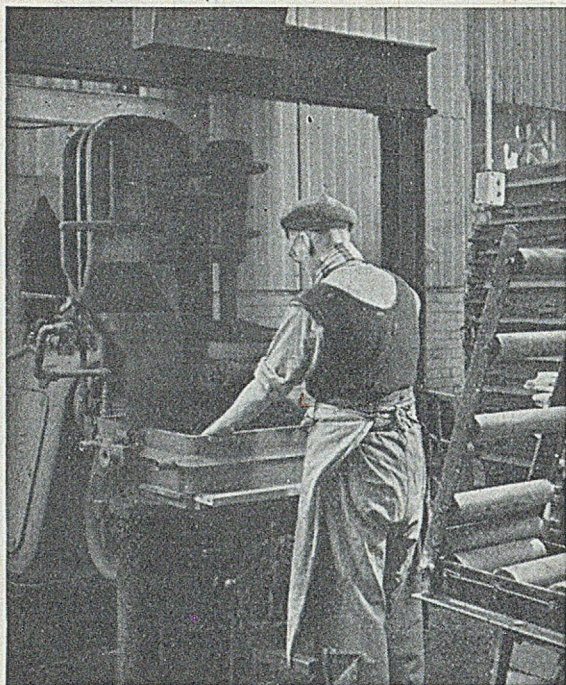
Close-up of one of the Moulding Machines during Sand Delivery and Jolting.
